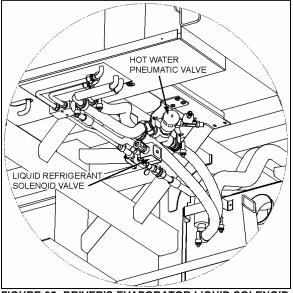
DRIVER'S EVAPORATOR LIQUID SOLENOID VALVE 22324
